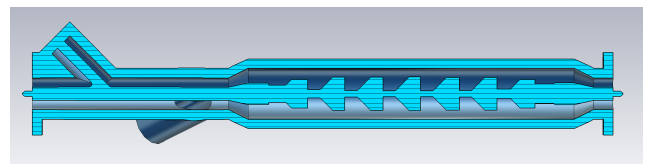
Illustration of the final device designed for 3D printing. A transversal cut-plane is presented, to reveal the inner part of the coaxial structure. Flanges for a SMA coaxial-line connector are included in the I/O ports.
